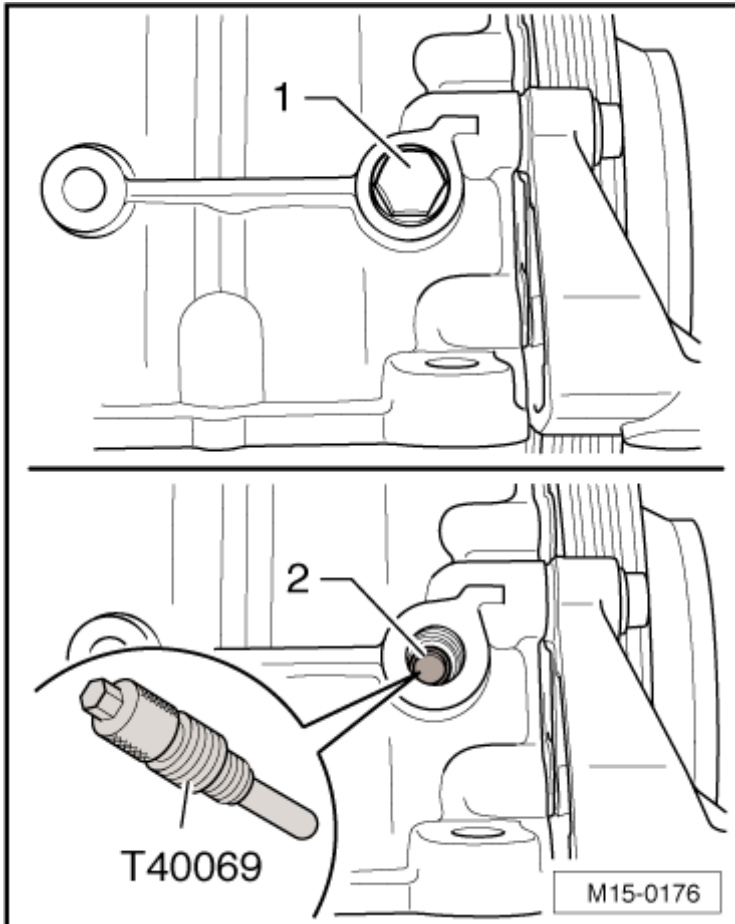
Identifying Crankshaft Must Not Be Rotated Out Over TDC Marking
